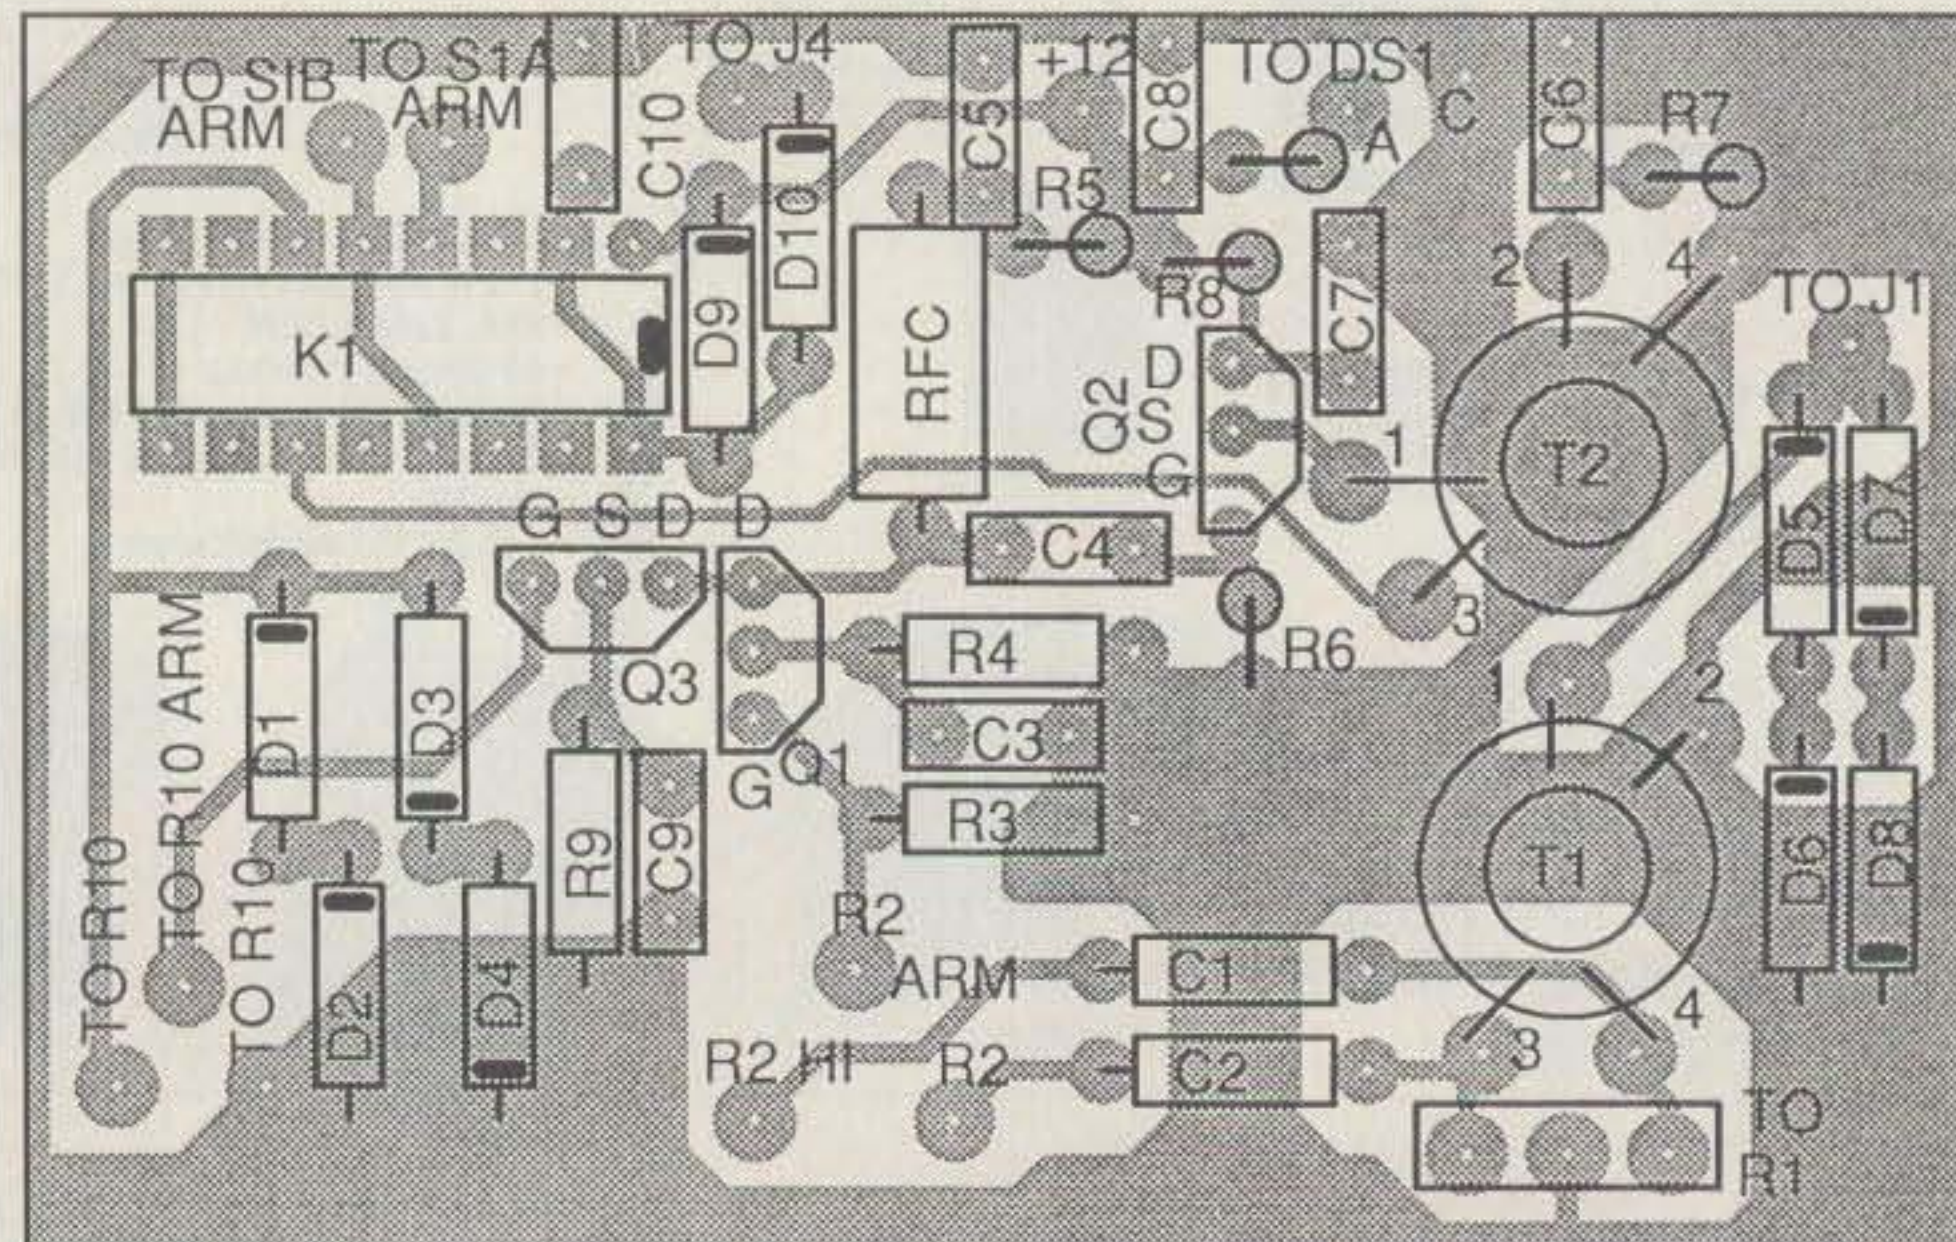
X-ray view of the component side of the PC board showing the parts placement.
